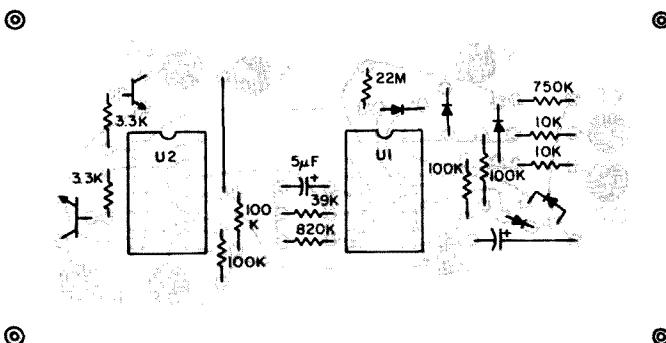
Parts placement for synthesizer scanning adapter (foil side view).
